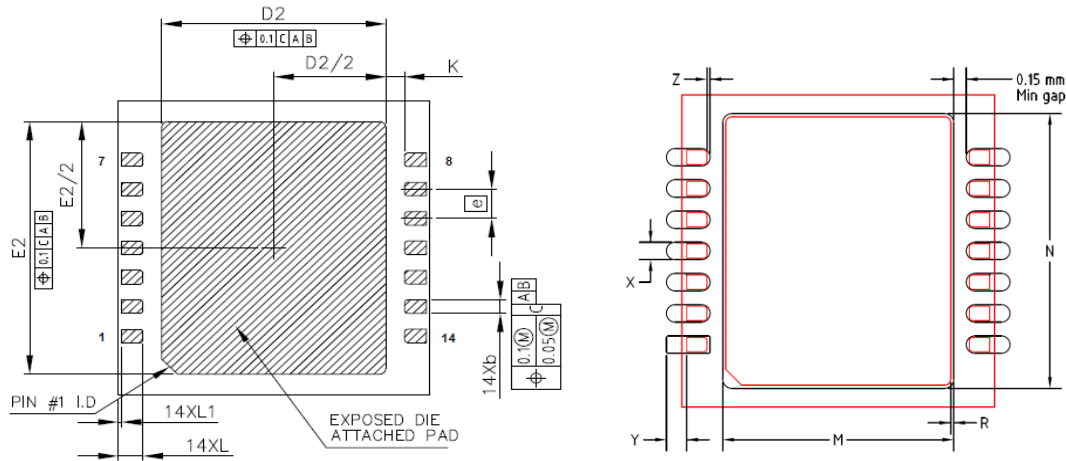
Package Outline Drawing (Left) vs PCB Land Pattern Layout (Right); (Bottom view)
